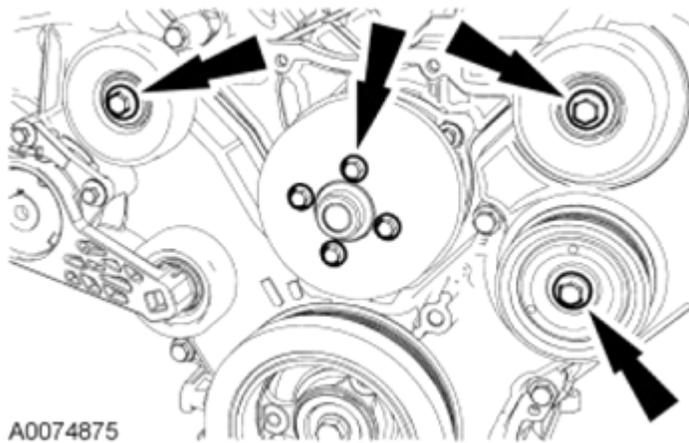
Locating Coolant Pump Pulley And Accessory Drive Belt Idler Pulley Bolts
